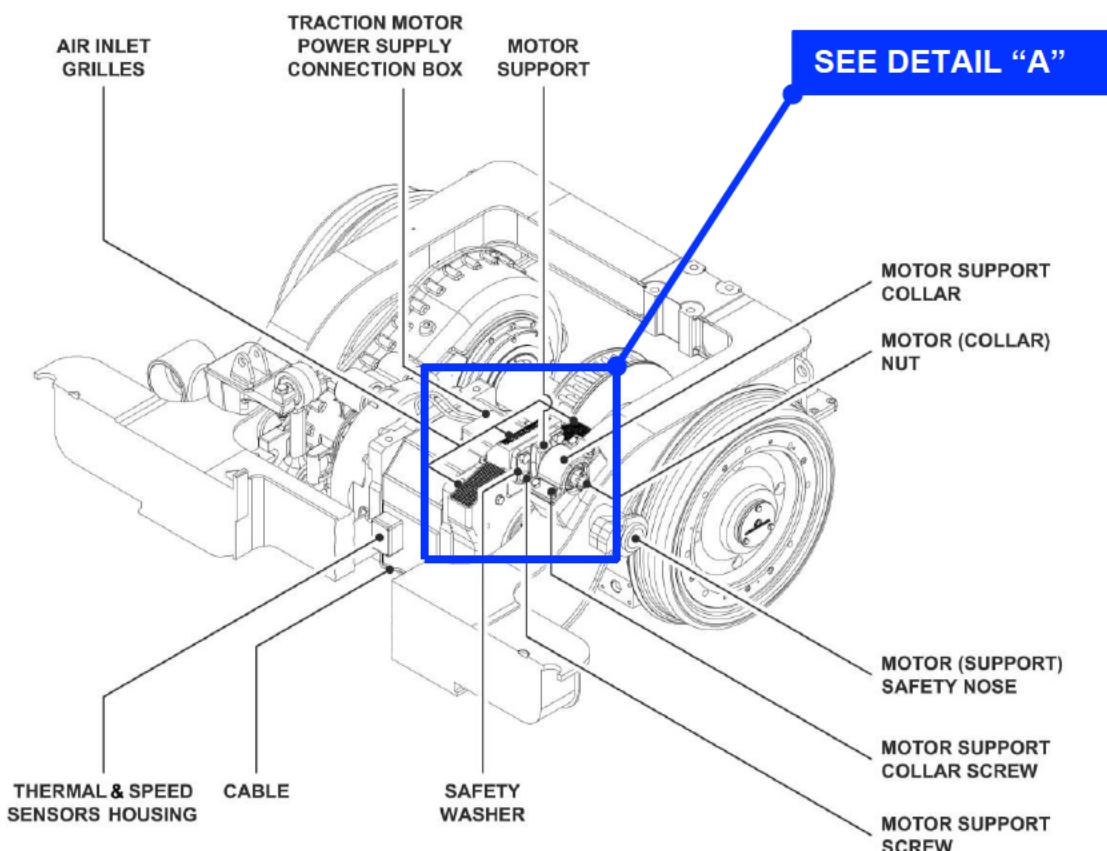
TRACTION MOTOR INSPECTION AT CABLE CONNECTION END
